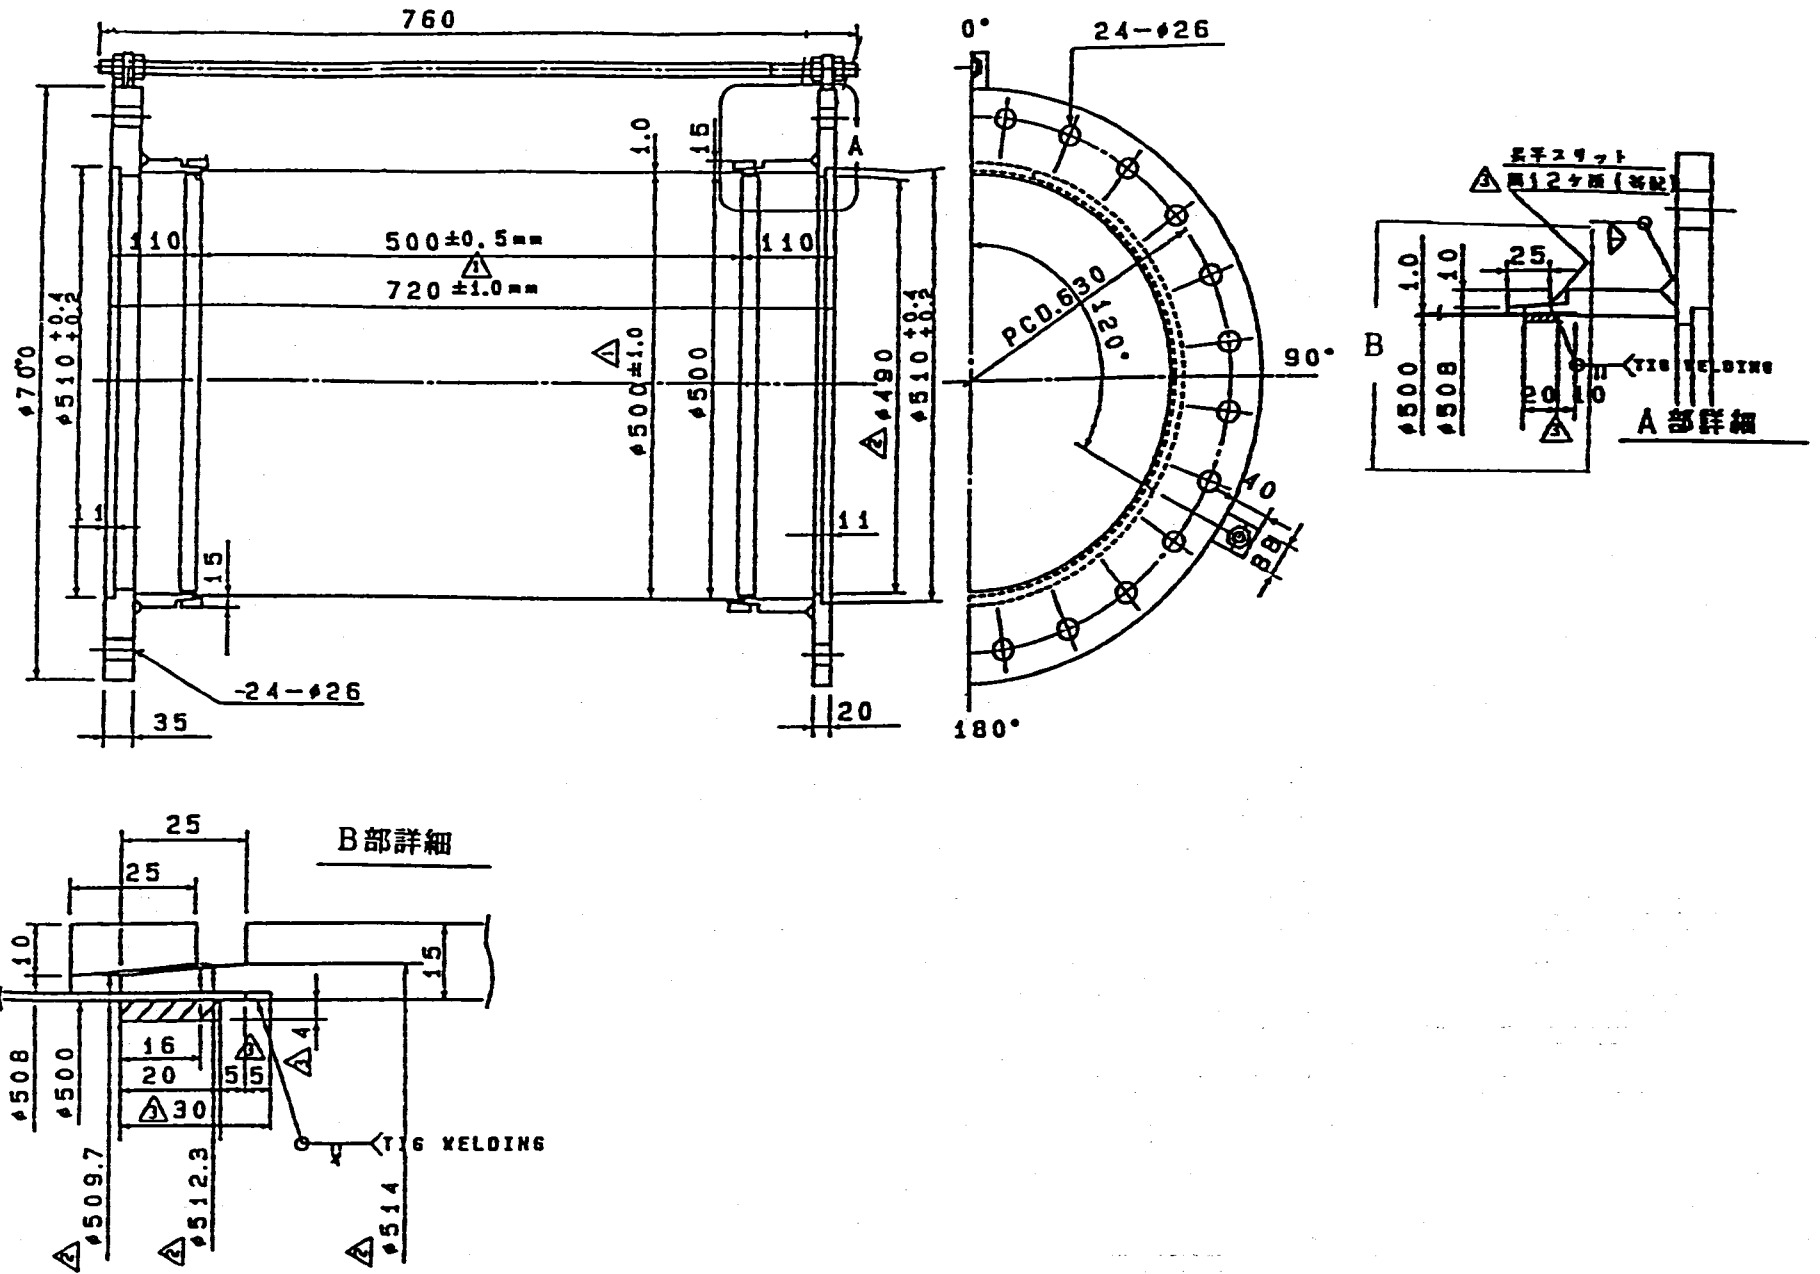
(2) Geometry and dimension of cylindrical test piece(CB500-1.0-02).
